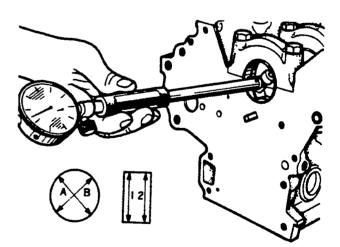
MEASURING MAIN BEARING I.D.
